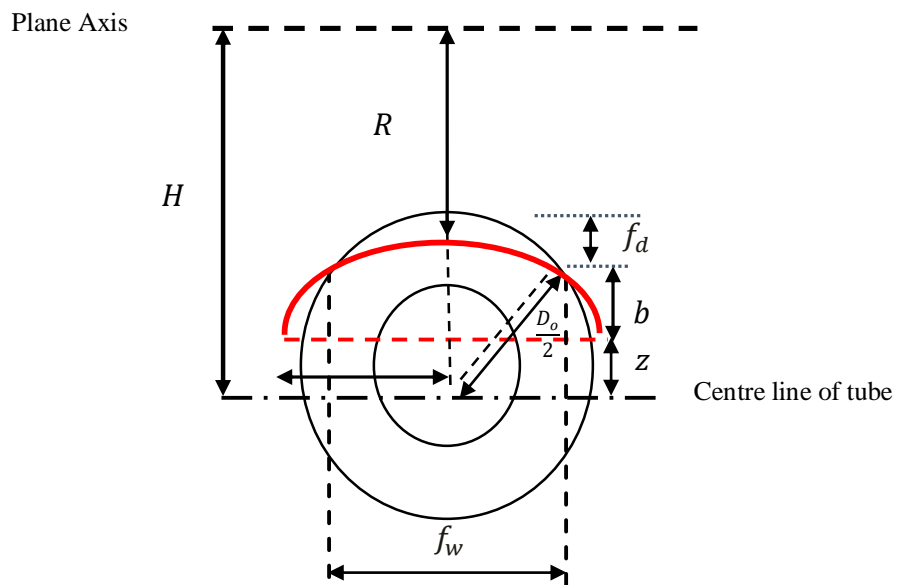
Front view of the n-shaped flaw showing the cutting plane in red, intersected with the tube cross-section.
